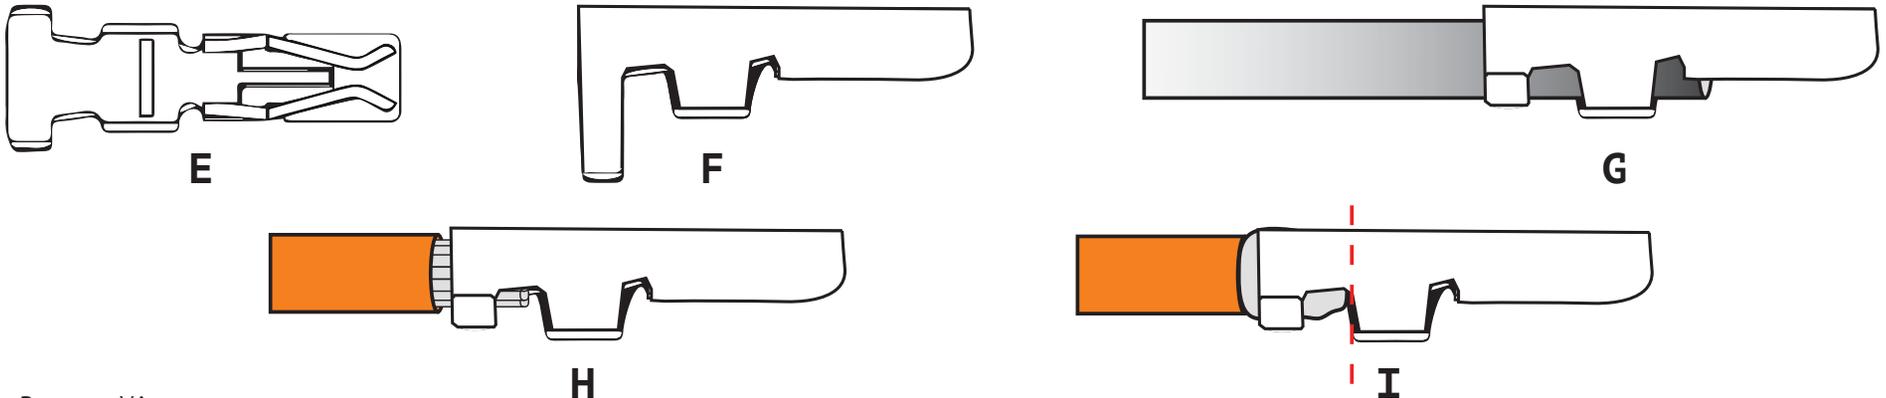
Female Socket Crimp Connector - HIROSE P/N: DF11-2428SCF
